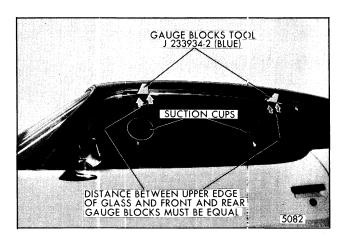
"F" Style Door Window Alignment (Rotated "Cocked" Glass in Body Opening Adjustment)
